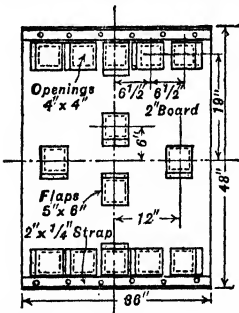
Arrangement of flap valves on a large jig plunger (bottom view).
